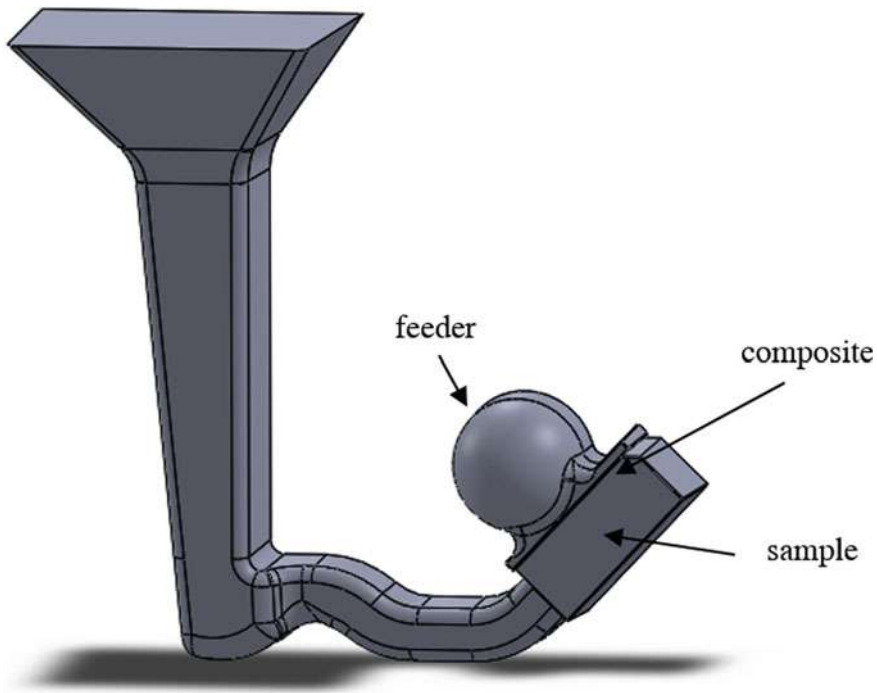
CAD model of the infiltration casting with the wear sample below the spherical feeder
